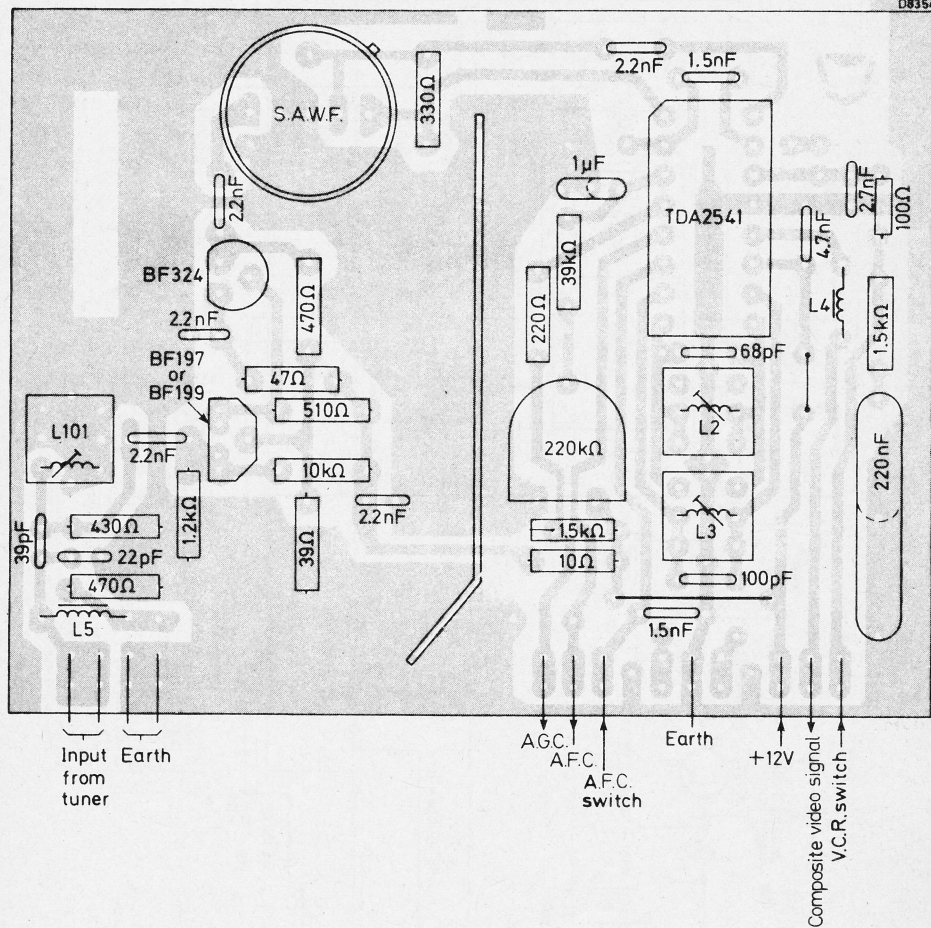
Recommended printed circuit board layout for surface acoustic wave filter and pre-amplifier
